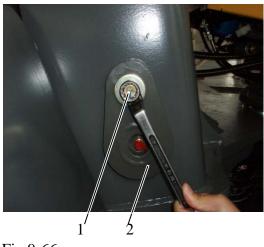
1 Bolt 2. Pin 5. Loosen the fixing bolt of the pin that connecting boom cylinder to front frame, support the boom and remove the pin with a rubber hammer. Lift the boom cylinder down.
